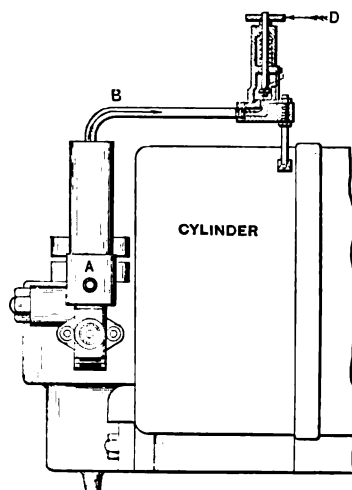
SIDE VIEW OF STOCKPORT ENGINE STARTING GEAR.
